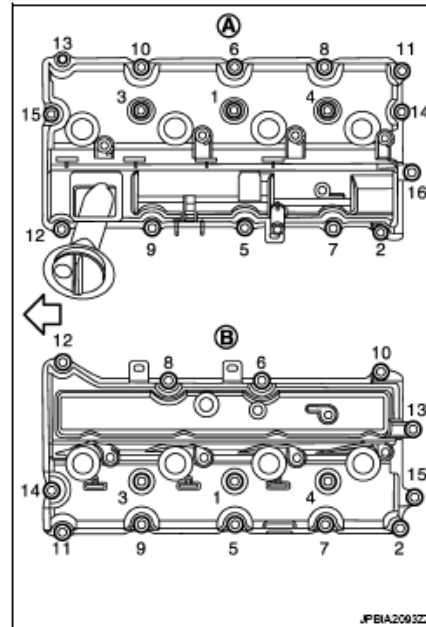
Identifying Rocker Cover Bolt With Tightening Sequence
